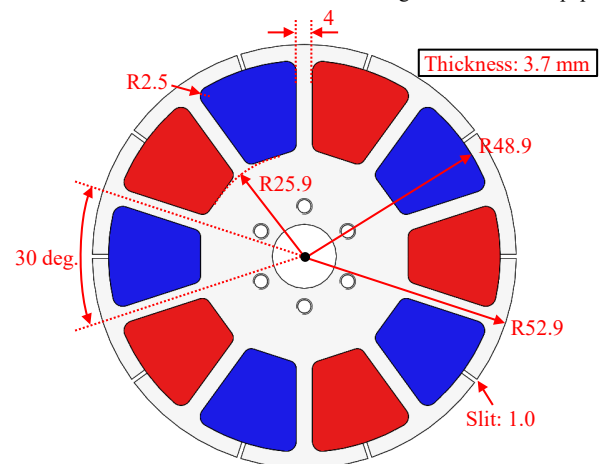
Rotor model and dimensions of the investigated AFM in this paper.
